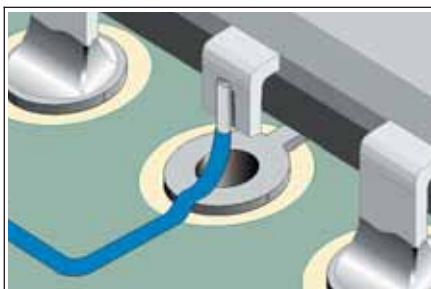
Acceptable Wire wrapped around component lead on solder side.
